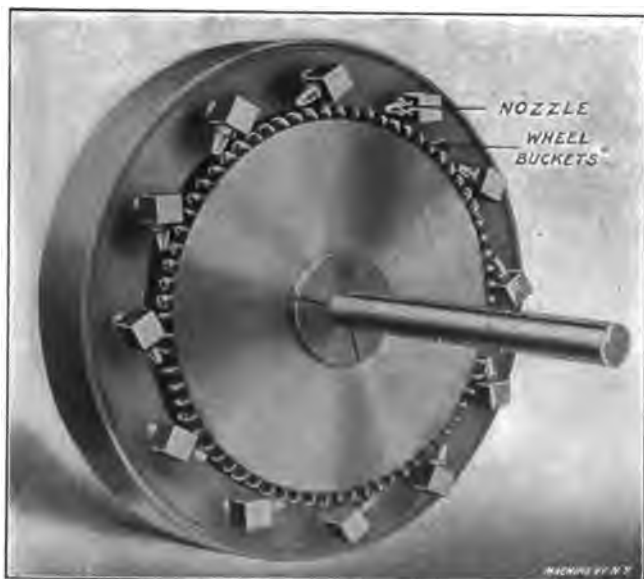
Wheel and Nozzles of the Kerr Turbine
